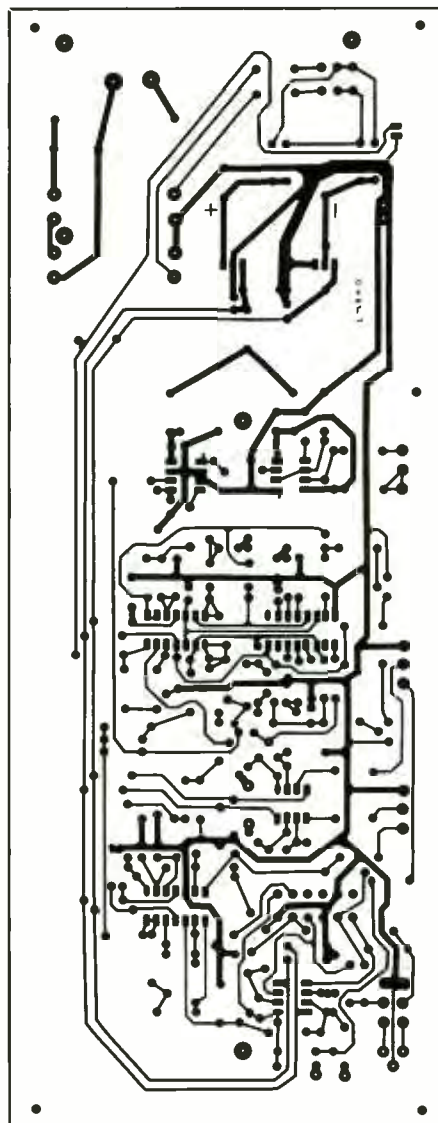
This reduction of the actual-size etching-and-drilling guide for the pc board requires 2x blowup.
